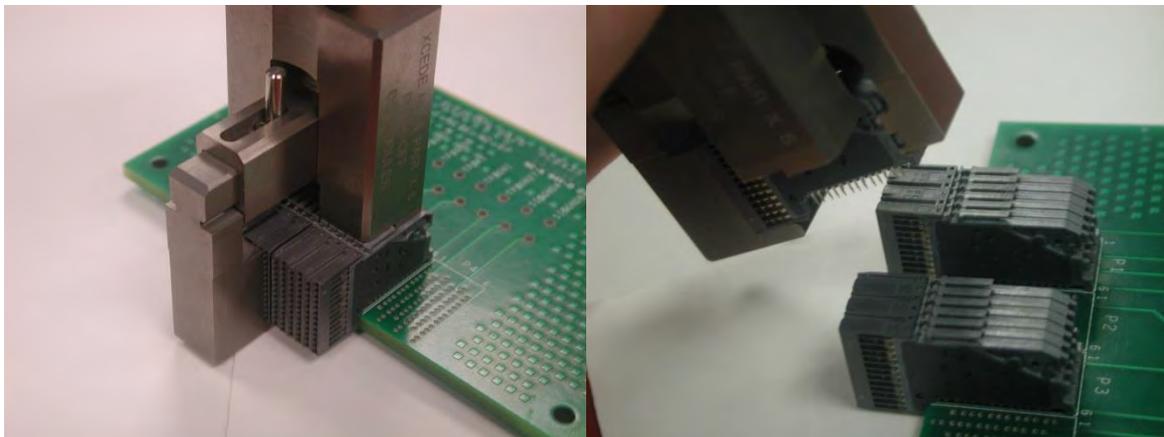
Daughtercard Module Removal Using 'Push Off DC Modules' Configuration
